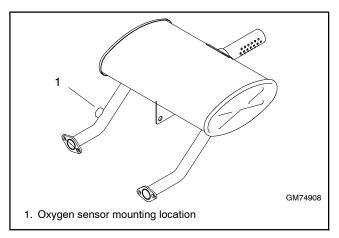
Oxygen Sensor Mounting Location on the 14RES/RESL
